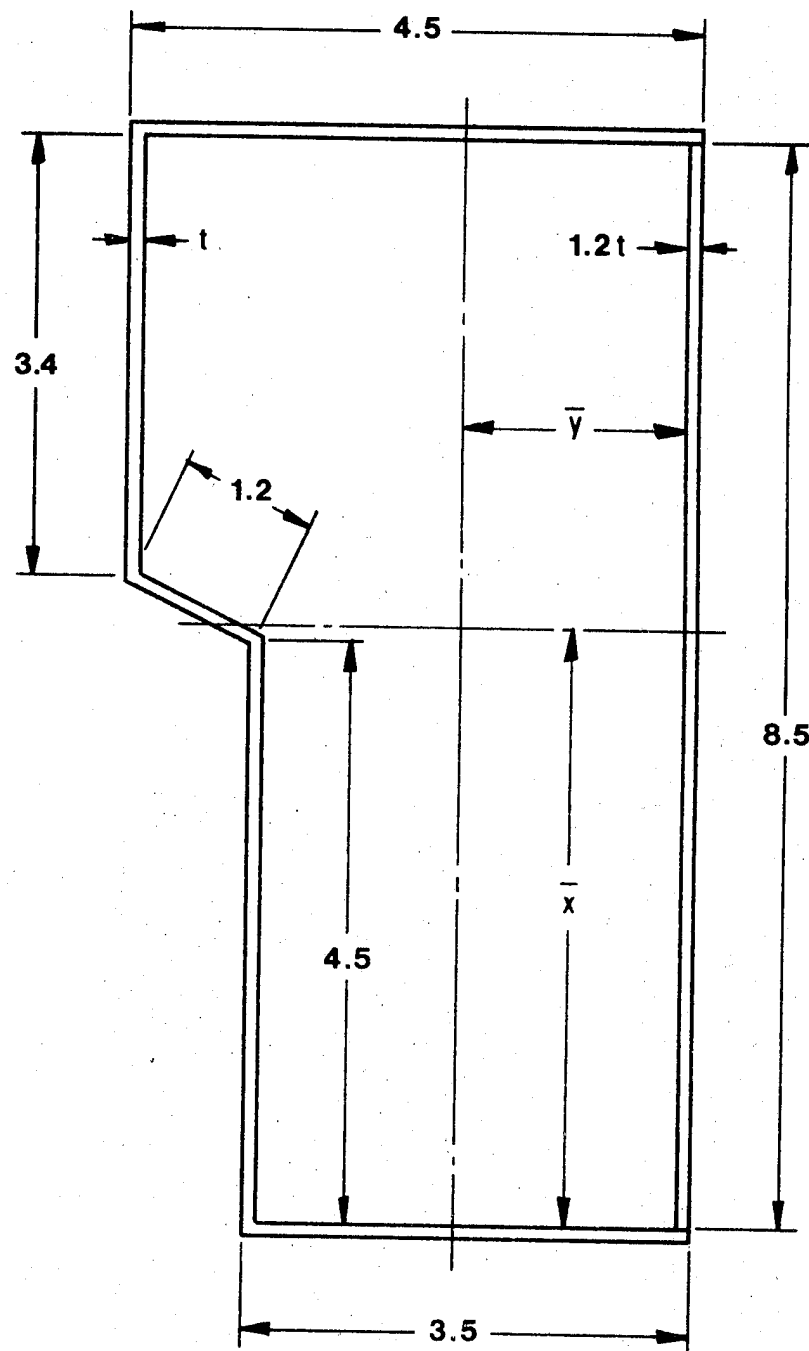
LARGE CAR BUMPER CROSS-SECTION
